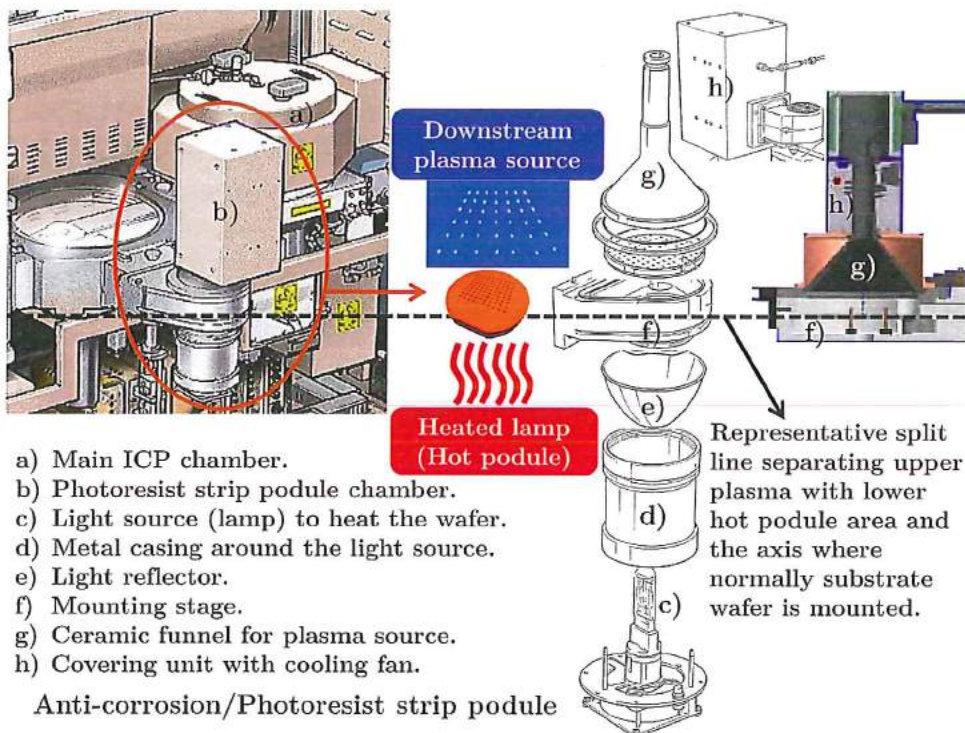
Image with exploded 3D view of the Anti-corrosion/PR strip podule.
